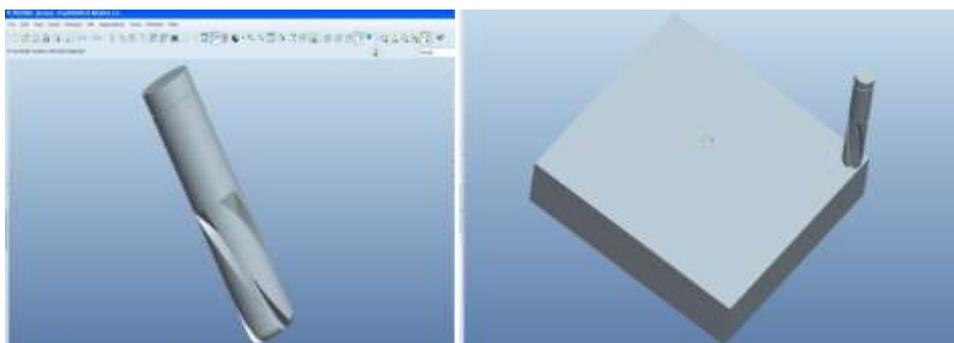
Model of Cutting Tool Assembly Of Cutting Tool and Work piece
